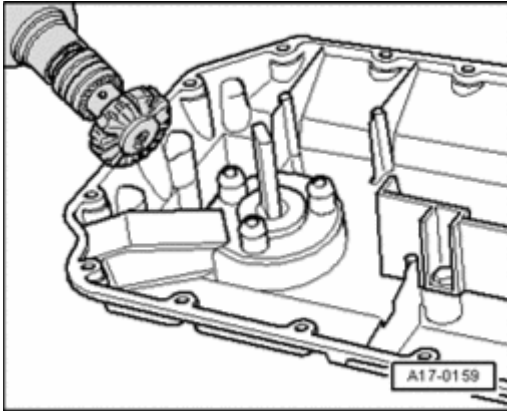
Using Rotating Plastic Brush To Remove Any Remaining Sealant From Oil Pan (Lower Part) And At Upper Part
